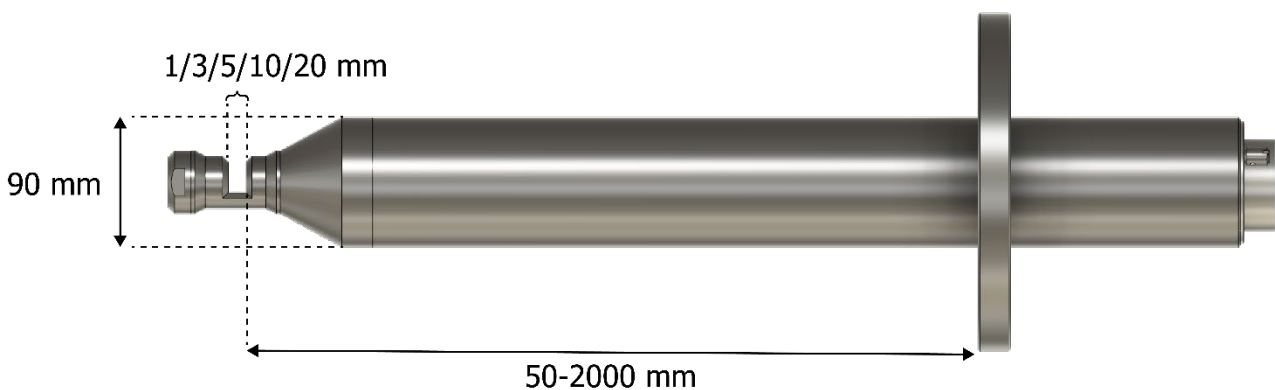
Pixscope 90 dimensions. Diameter = 90 mm, measurement gap = 1/3/5/10/20 mm, length from measurement gap to flange = 50-2000 mm.
